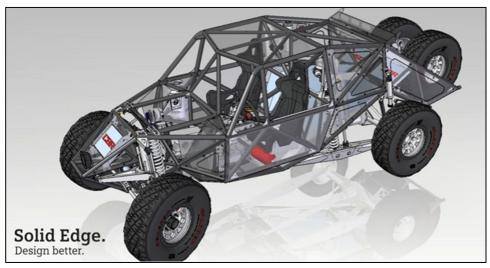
Camburg Design Using Solid Edge (Courtesy of Camburg Engineering, Inc.)
